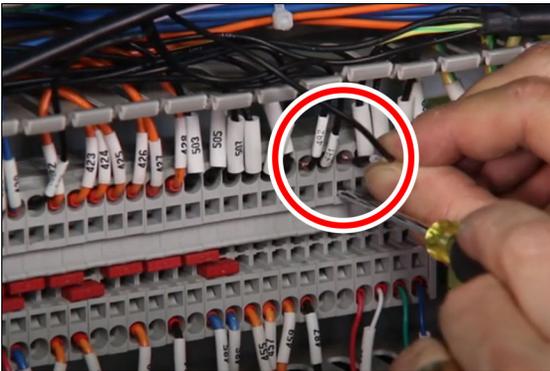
Connecting wire 490 and wire 491 to the terminal block.
